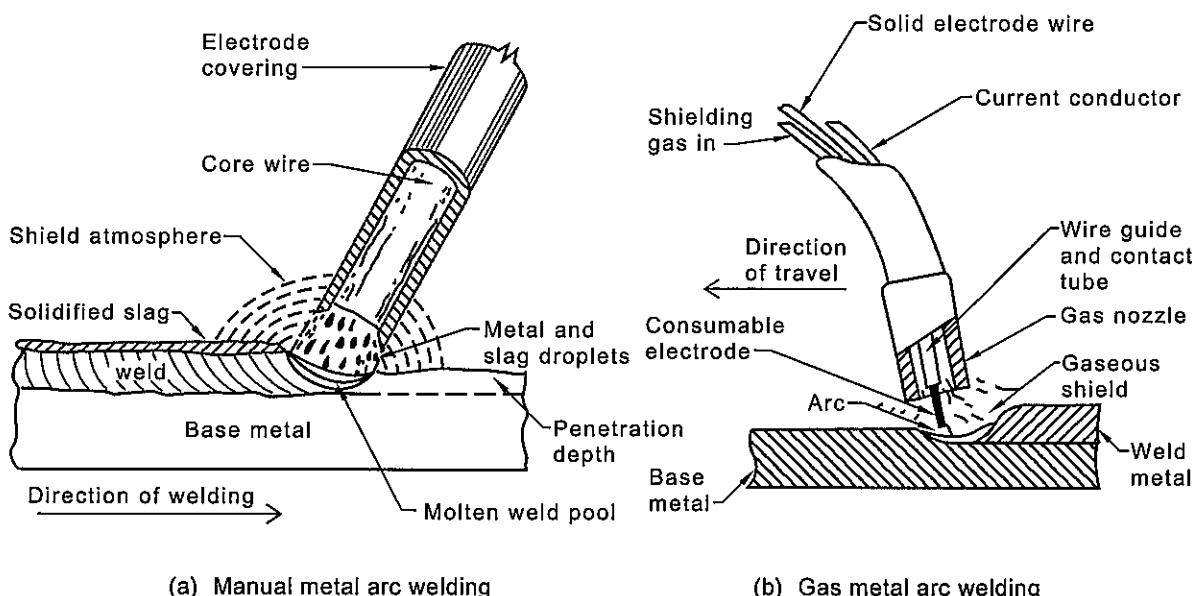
TYPICAL ARC WELDING PROCESSES
